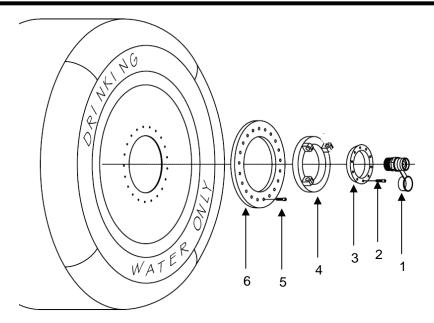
Adapter and bearing, swivel, and spacer plate removal.
